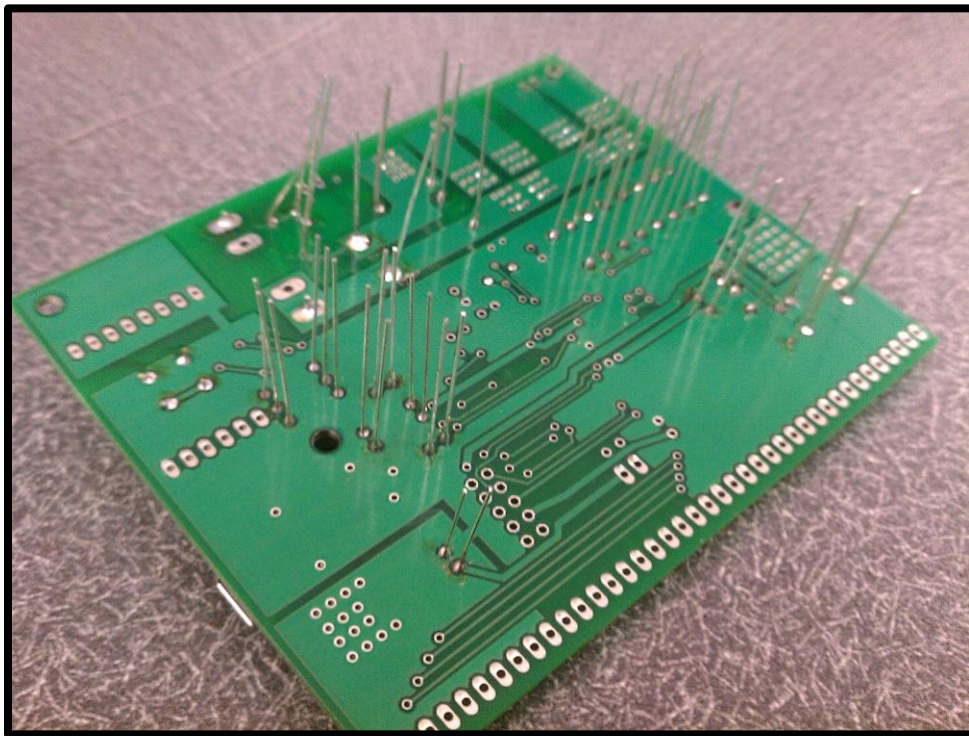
SOLDERING OF THROUGH HOLE COMPONENTS
